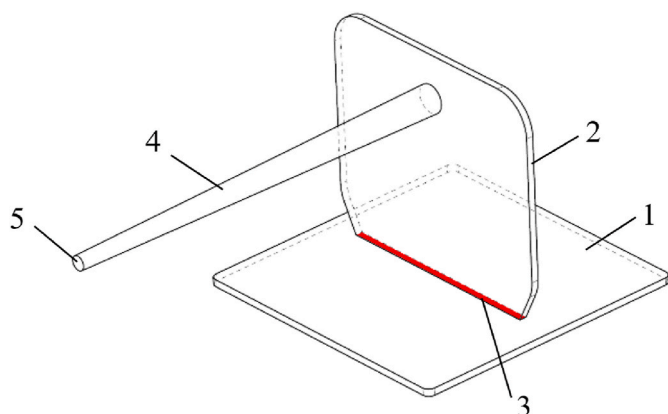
T-shape test specimen: 1 – base plate; 2 – overmolded rib; 3 – interface (contact surface); 4 – sprue; 5 – injection point.
